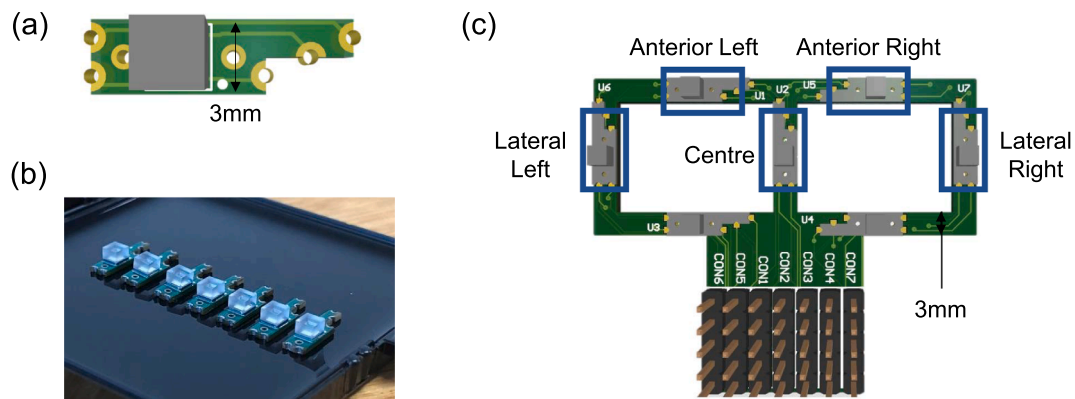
Design of PCB-A (a) with maximum dimensions of $10.50 \text{ mm} \times 3.00 \text{ mm}$, flip-chip bonded die (b), and PCB-B (c) with maximum dimensions of $48.90 \text{ mm} \times 20.00 \text{ mm}$ for the region embedded within the implant. The thickness of PCB-A was 0.41 mm ; the thickness of PCB-B was 1.16 mm . The pressure sensing dies were bonded to PCB-A using flip-chip bonding. Gold bumps were bonded to the PCB attachment pads using the TPT HB100 Wire Bonder and $25 \mu\text{m}$ gold wires at 150°C (100mW , 200 ms , 250mN). A Finetech Fineplacer Lambda Die Bonder was used to apply thermocompression bonding, with a force of 4 N for 60 s at 320°C , to attach the pressure sensor die to PCB-A. EpoTek 301–2 epoxy was applied as an underfill between the die and PCB-A, and desiccated in a vacuum for 20 min before curing at 80°C for 3 h . The sensors were soldered to 5 locations (c); Lateral Left (Lat Left), Anterior Left (Ant Left), Centre, Anterior Right (Ant Right), and Lateral Right (Lat Right).
